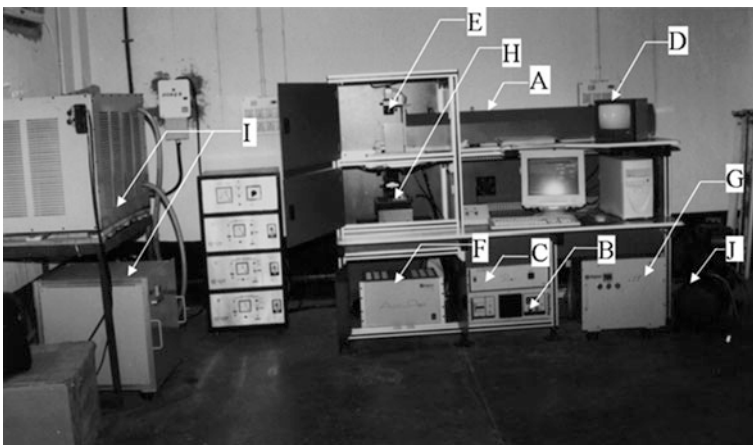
Photographic view of laser beam machining. A = laser head, B = power supply unit, C = RF Q-switch driver unit, CNC X-Y-Z work table, D = CCTV, E = CCD camera, F = RF Q-switch driver unit, G = chiller unit, H = CNC controller unit, I = heat exchanger unit, J = air compressor
